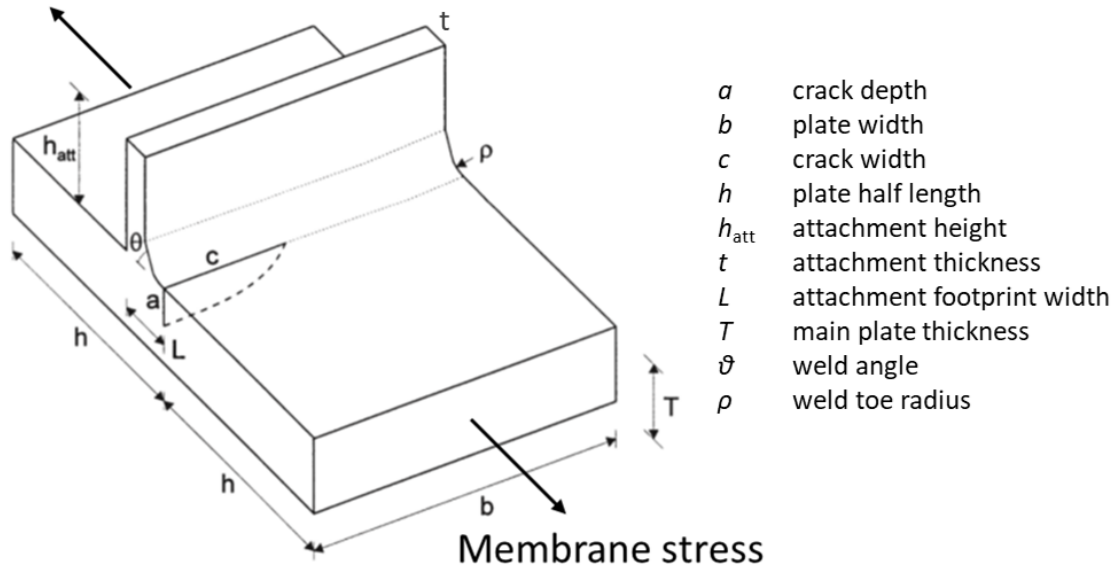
Schematic of 3D geometry and dimensions of T-joint with crack
